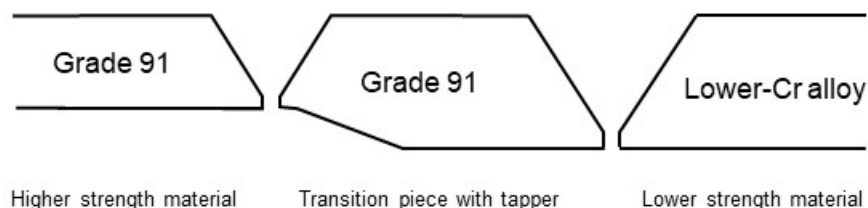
Geometry of the Joint of Grade 91 steel to lower-Cr alloy steel dissimilar metal welding
